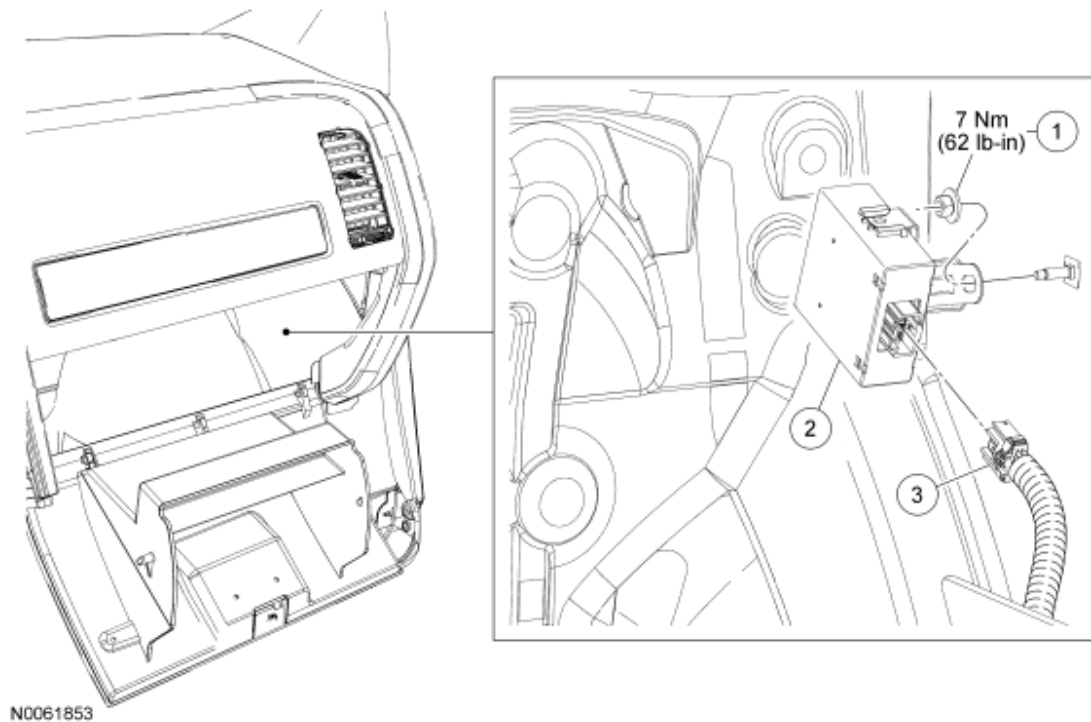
Exploded View Of 4X4 Control Module With Torque Specification
